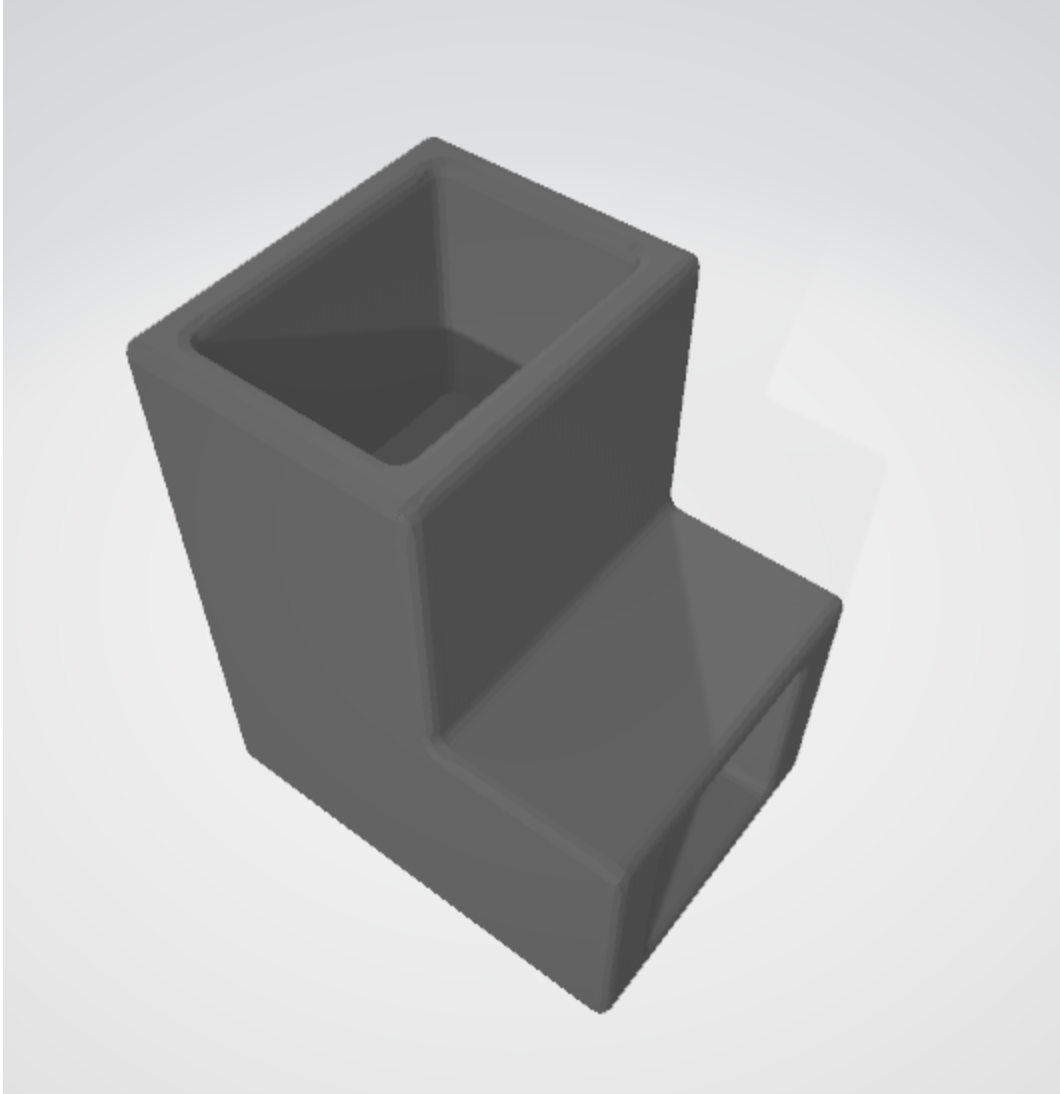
A 3D model of the 3D printed toll extender part. Used to attach and detach the horizontal beam extensions to the tool.
